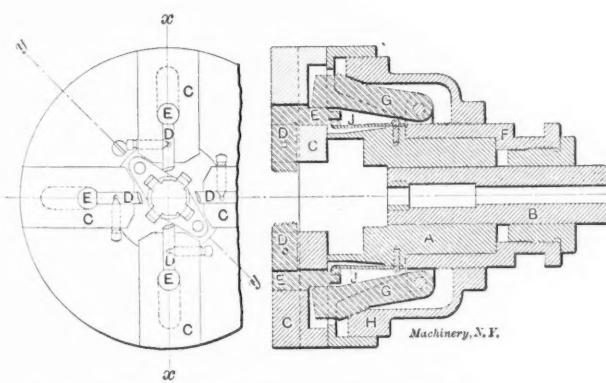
Face View of Die Head and Section on Line x-x, through Die Blocks, with Reamer Removed
